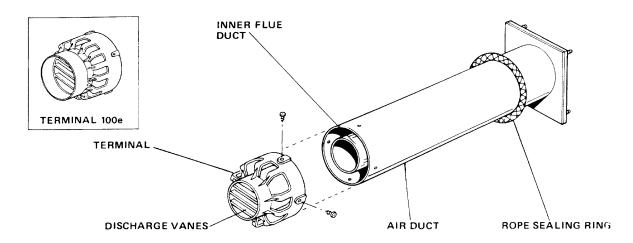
AIR/FLUE DUCT ASSEMBLY
